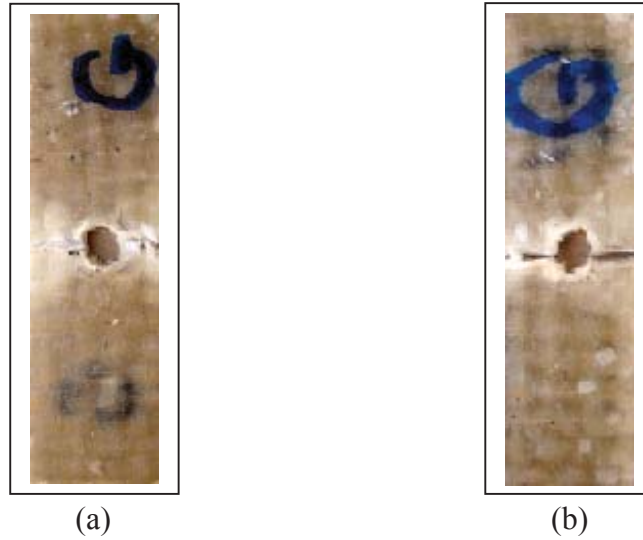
fracture modes of (glass/ polyester) a- moulded-in hole, b- drilled hole
